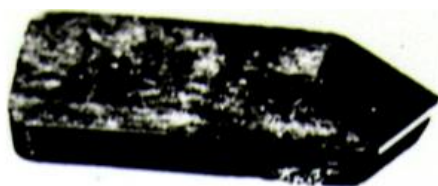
Cast bimetallic metal-cutting single-blade knife of a combined milling tool
